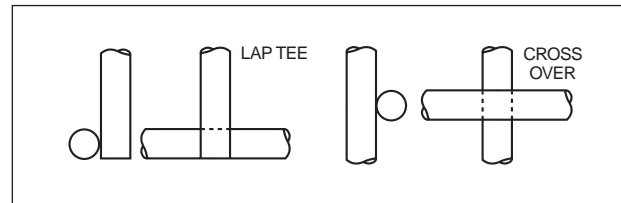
Designs for sealed joints by weld-all-around techniques (high-temperature service).
